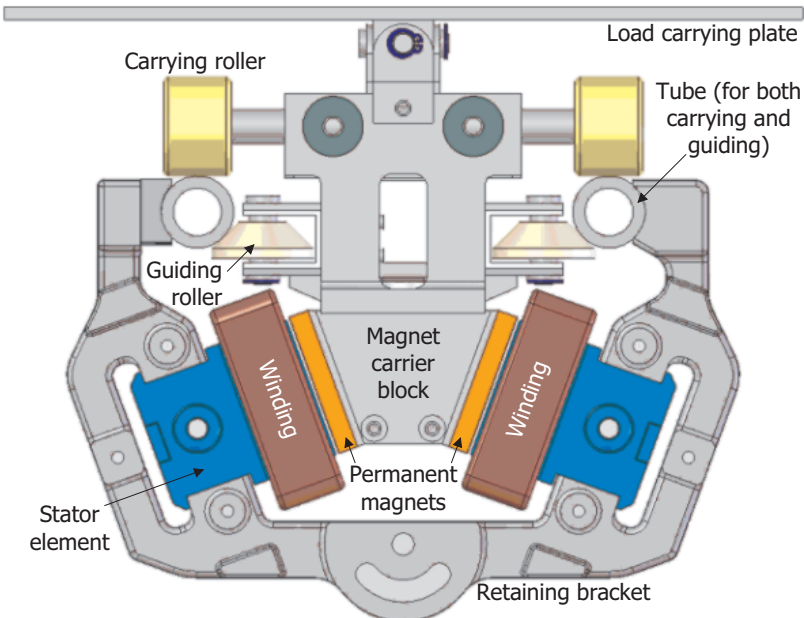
Transversal cut through the double sided section of the machine. Source: [43]
